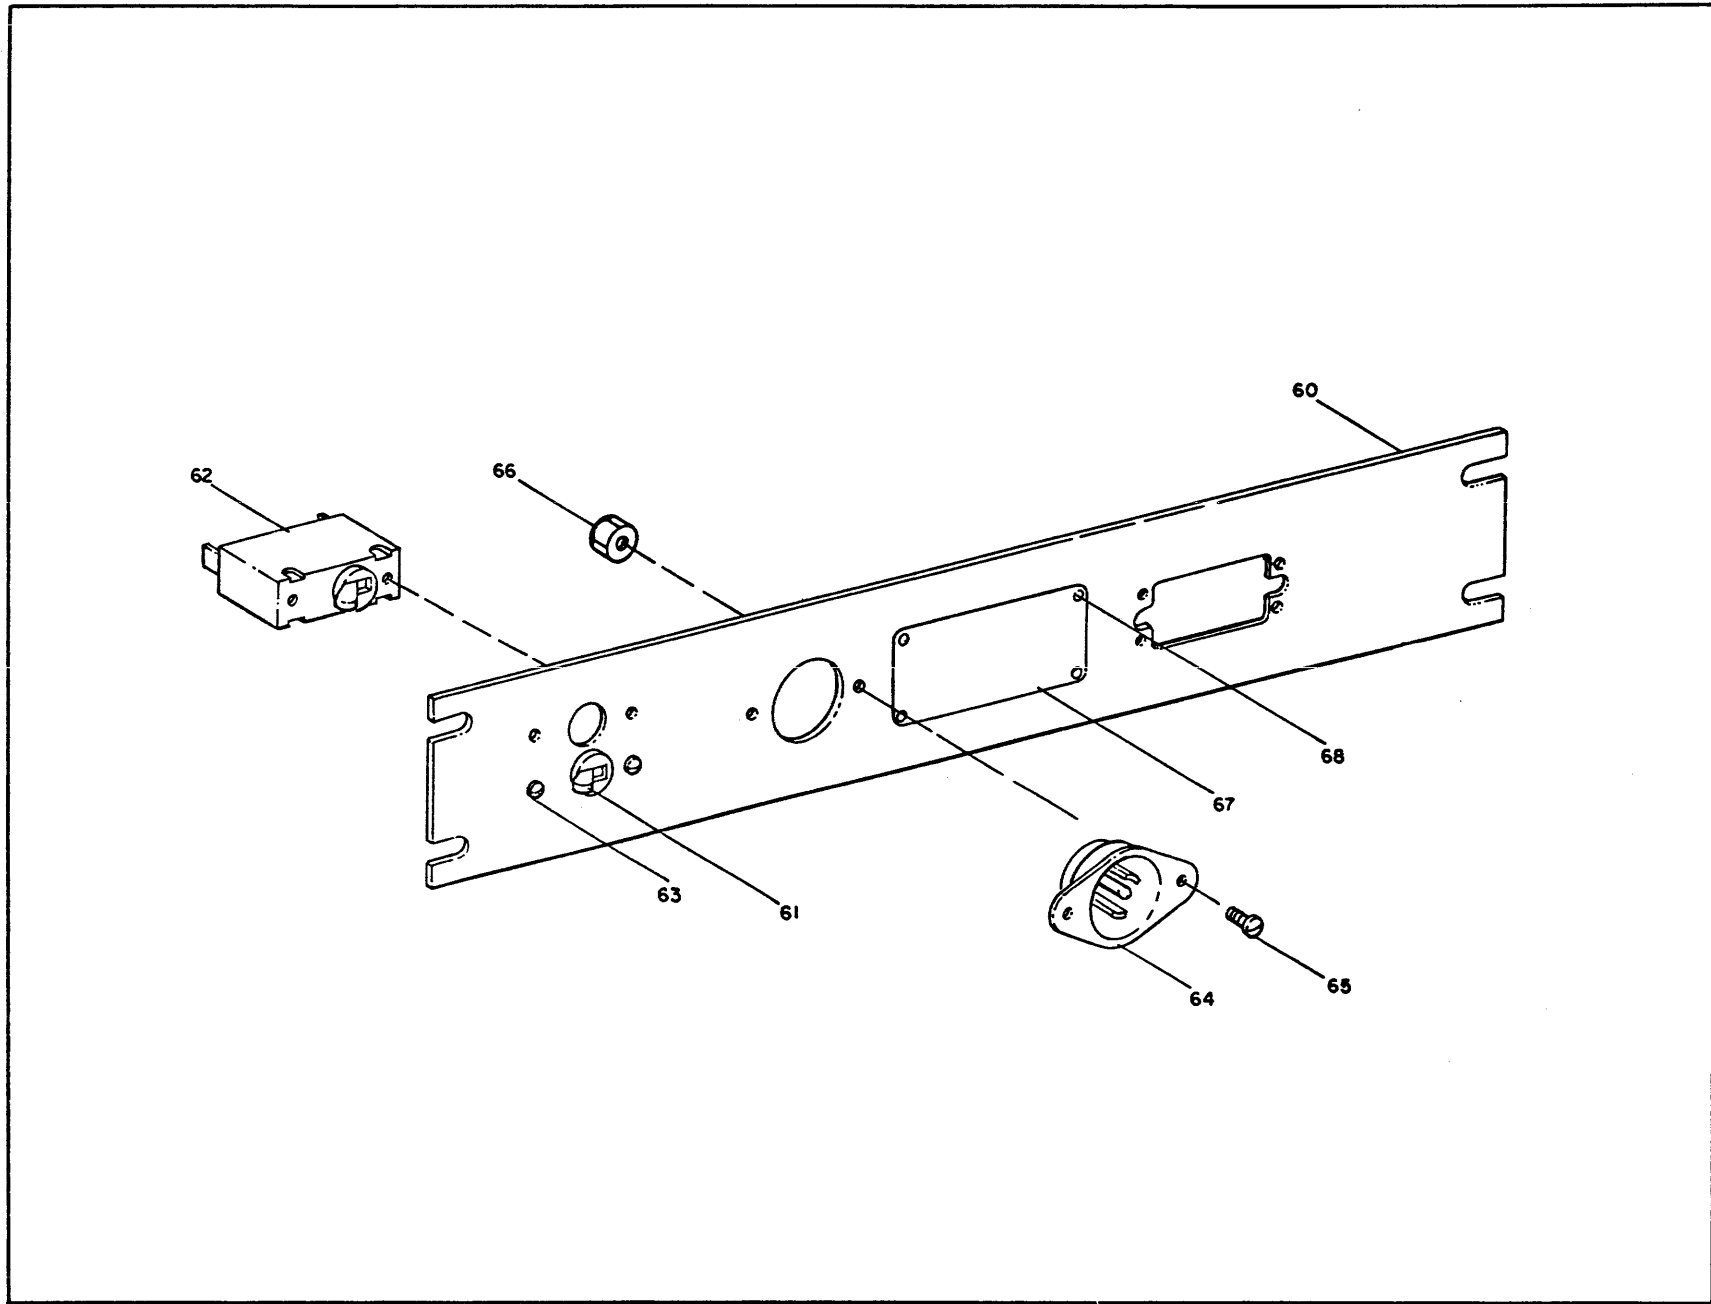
TRIM GROUP ASSEMBLY (sheet 3 of 6)
